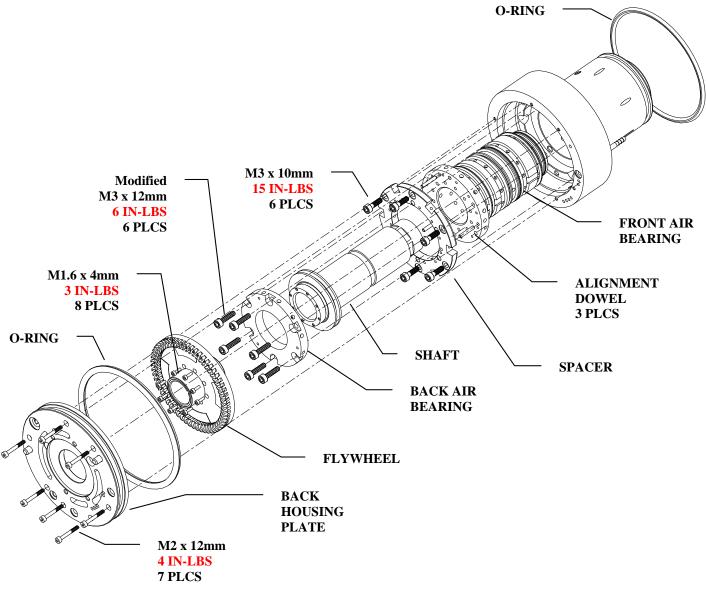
Flywheel, Shaft, Bearings, Motor Housing
